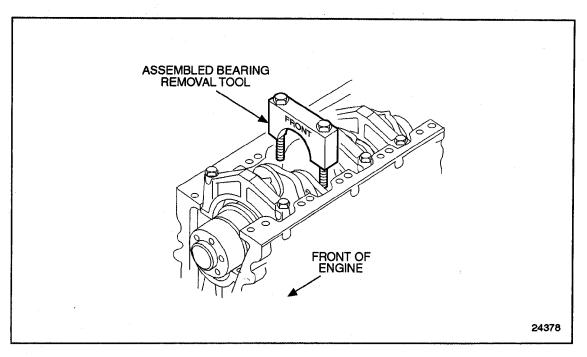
Upper Main Bearing Shell Remover Tool Installation
